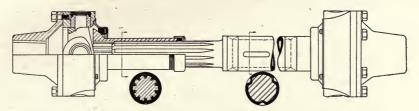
Arvac Universal Joint and Propeller Shaft Assembly.
